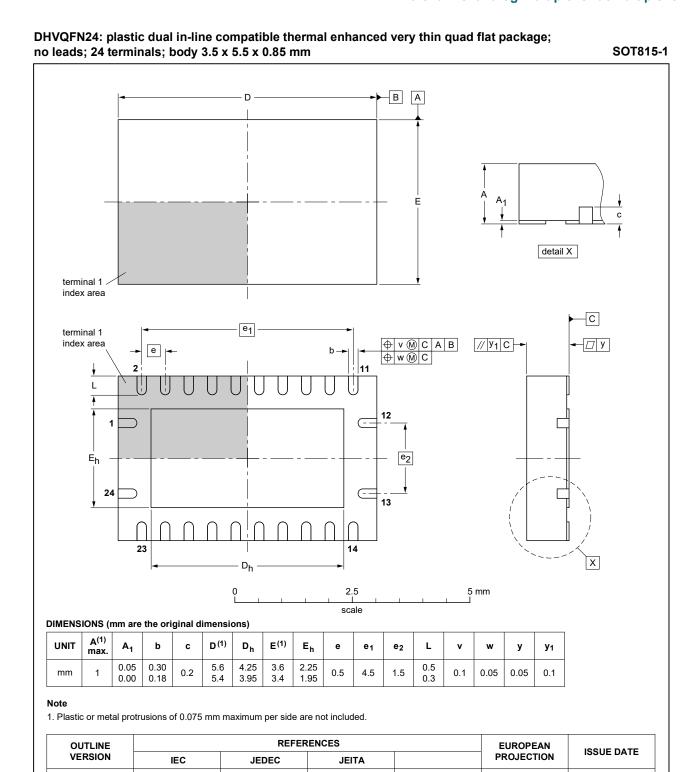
Package outline SOT815-1 (DHVQFN24)
